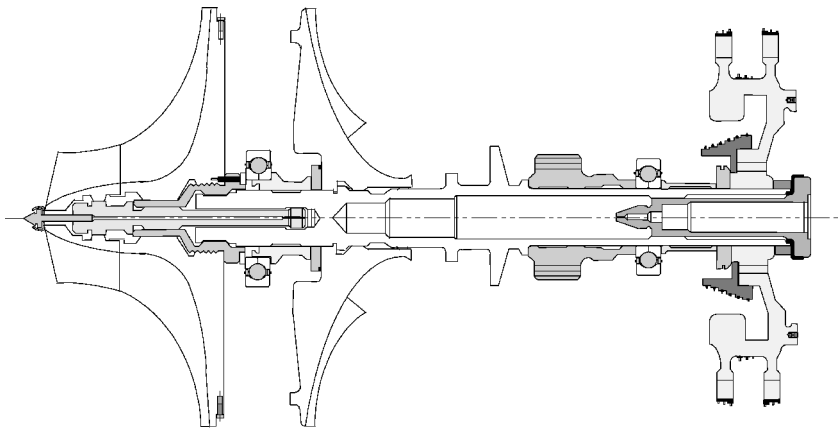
Liquid hydrogen fuel turbopump rotating assembly.
